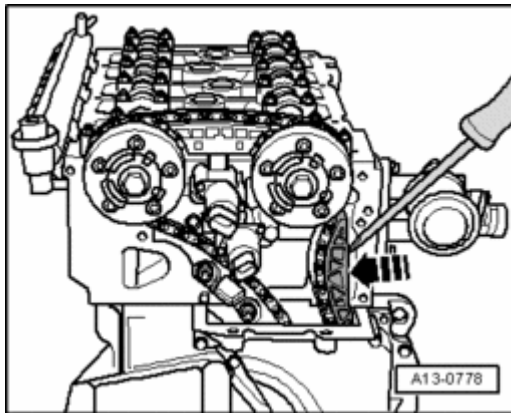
Pressing Guide Rail Firmly Against Camshaft Timing Chain Manually To Prevent Chain From Slipping
